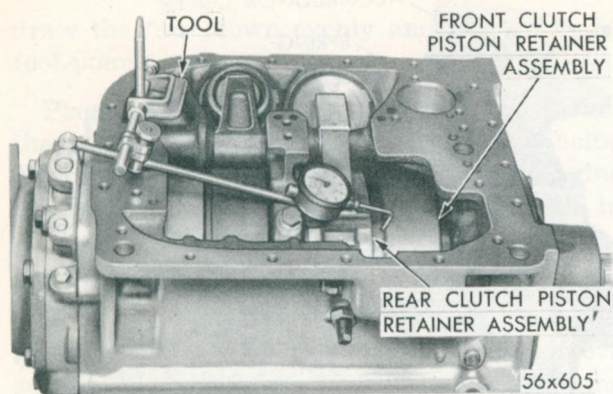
Checking Front Clutch Piston Retainer Assembly End Clearance
